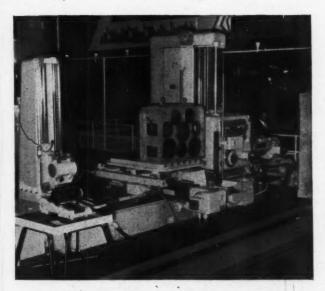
Of 4.33 in. spindle diameter, this Sverdlova, type 262 PR1, horizontal borer is provided with punched card equipment for digital control of movements of the table in two directions and of the spindle head, also for adjustment of the tool to suit the diameters to be bored
